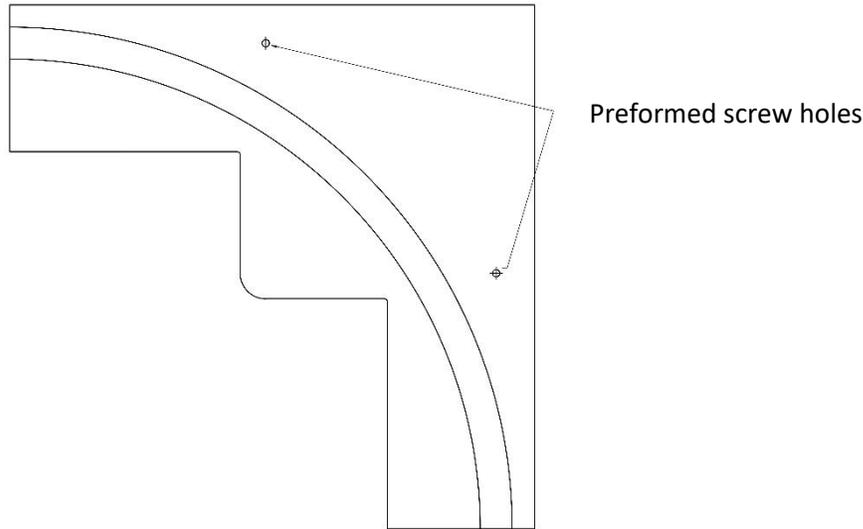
LOWER CORNER TRACK SCREW HOLES
